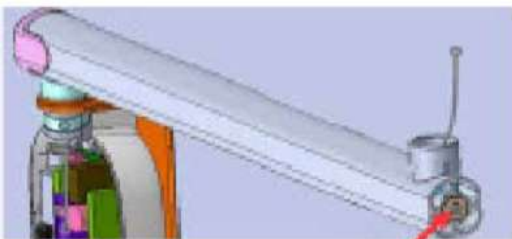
Remove bottom caps (M3x6 self tapping Counter sunk screws)Use screw driver
